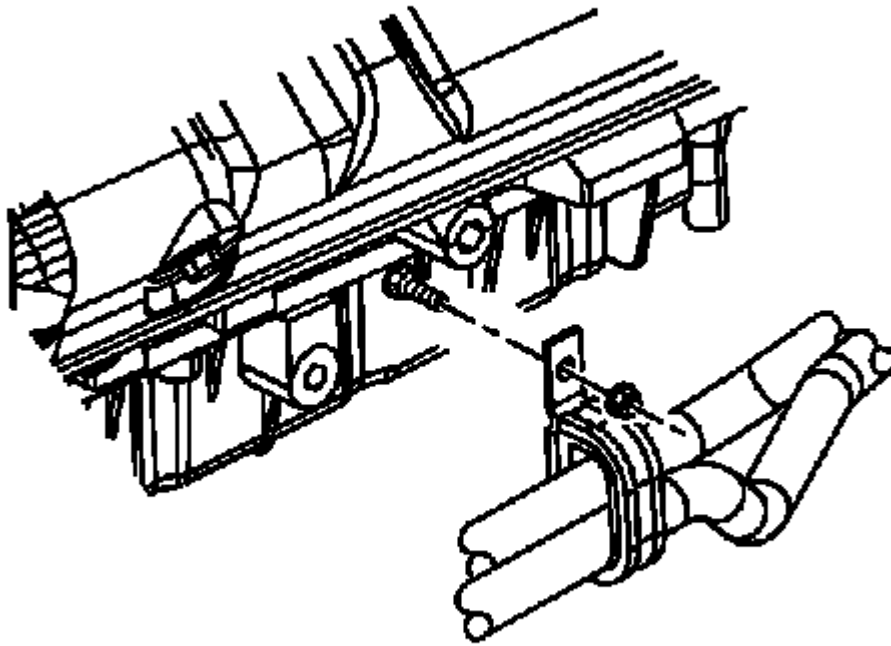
View Of Transmission Oil Cooler Lines, Bracket & Bolt
